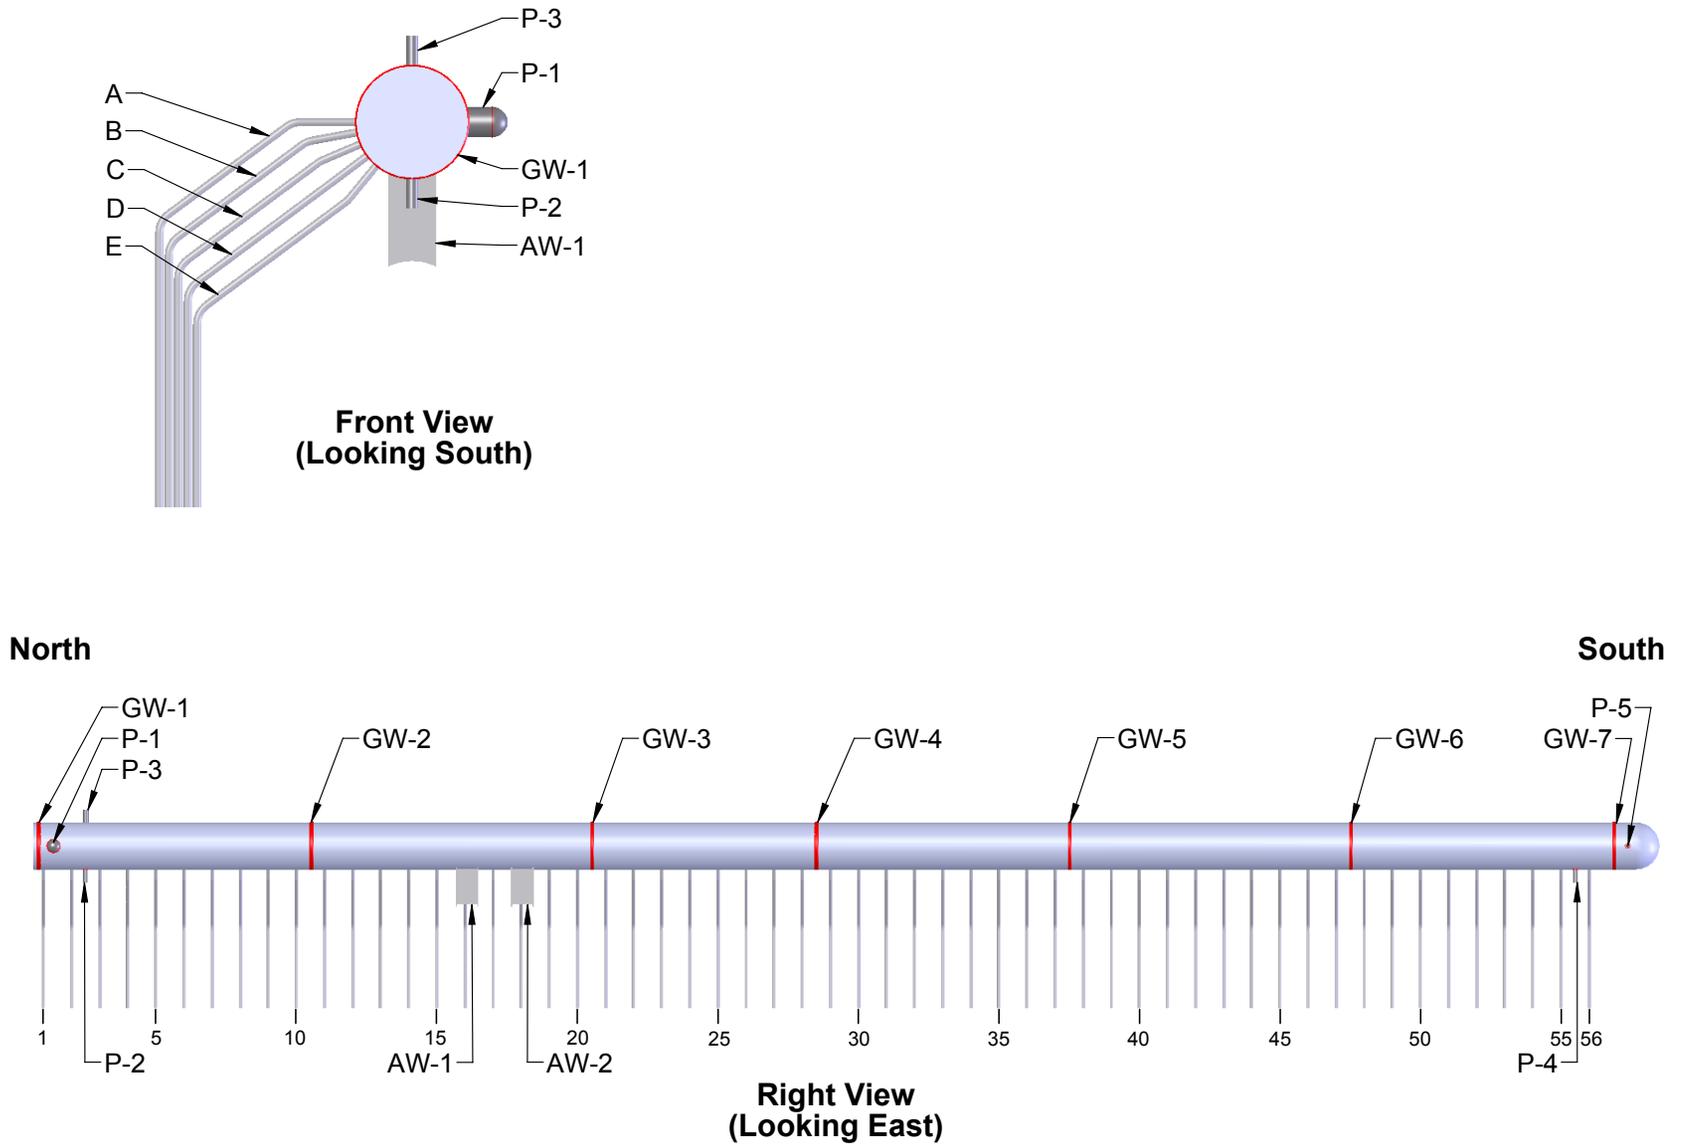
Sketches of the Upper Finishing Superheater Outlet header
